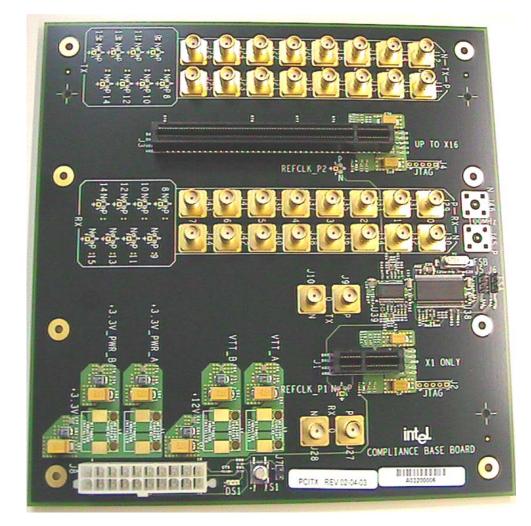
Compliance Base Board (CBB) Add-in Card Fixture
